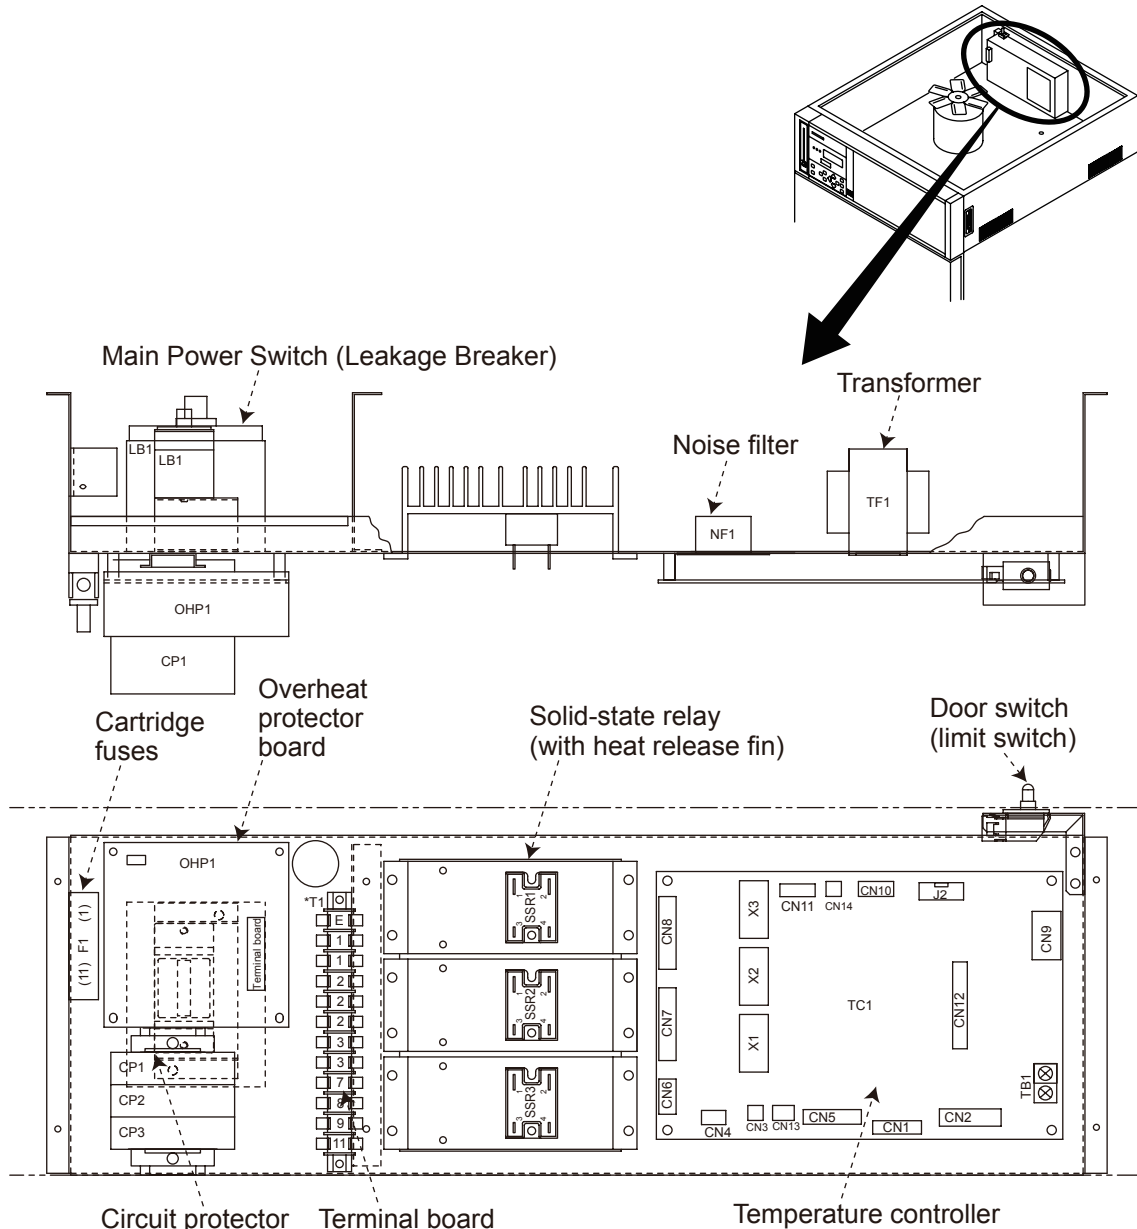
Electric parts chassis layout for all models of PV(H)-212, 222, 232, 332 200V AC
